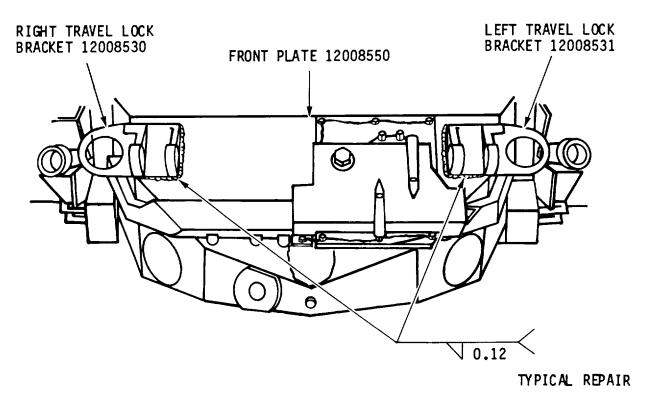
Repair welding procedure for travel lock assembly brackets 12008530 and 12008531.
